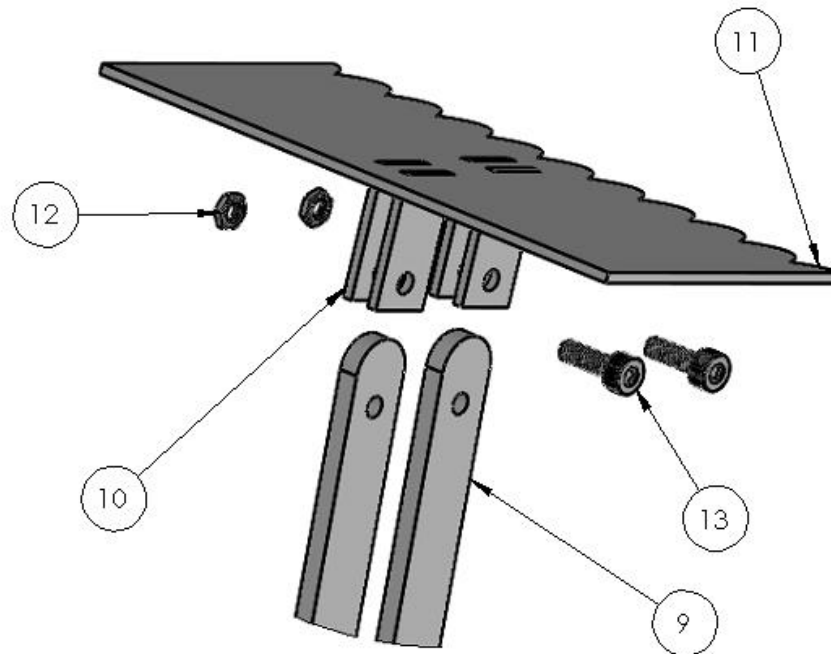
Detail view of wing sample-vertical arms sub-assembly (exploded view).
